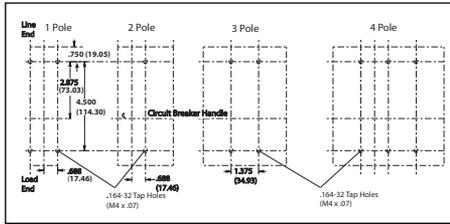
Circuit Breaker Mounting Bolt Drilling Plans
